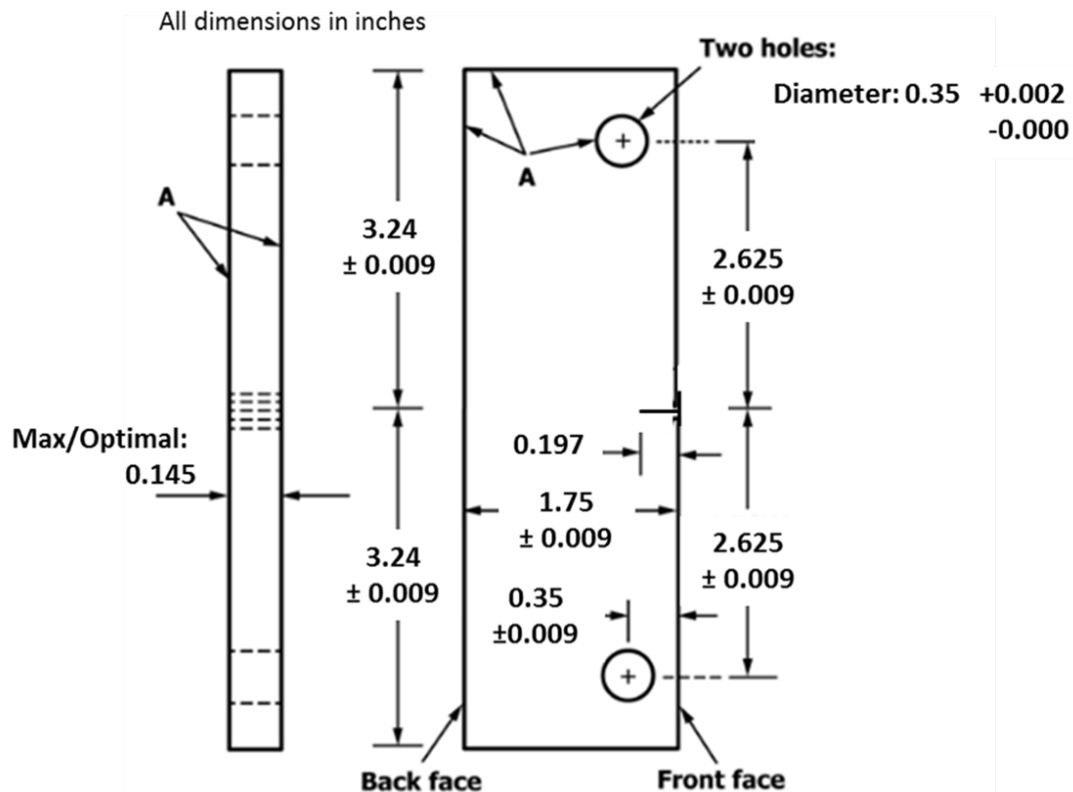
I.11. ESE(T) SCC specimen drawing with dimensions.
